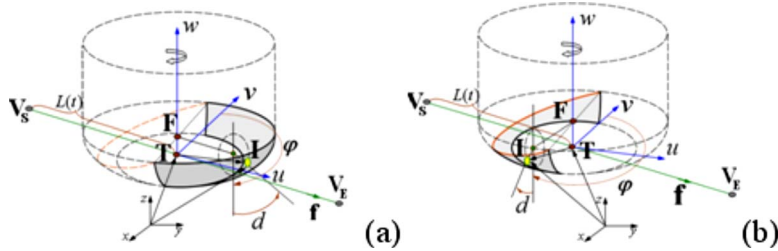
Engagement regions of the (a) front and (b) back toroidal contact faces for the toroidal end mill
